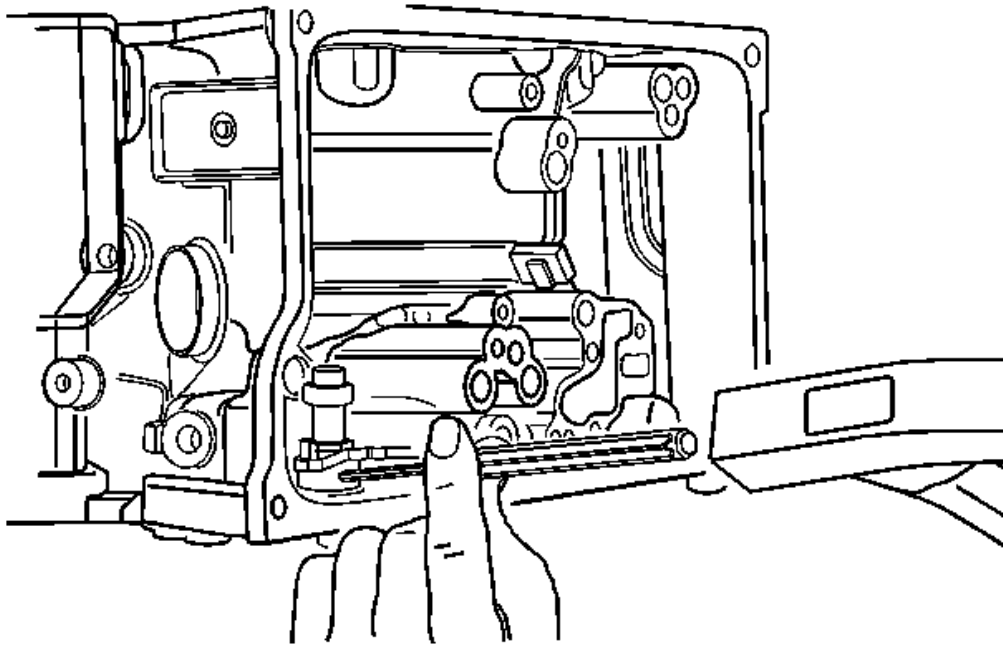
Front Wheel Drive Shaft Seal - Torque Converter Housing Side
